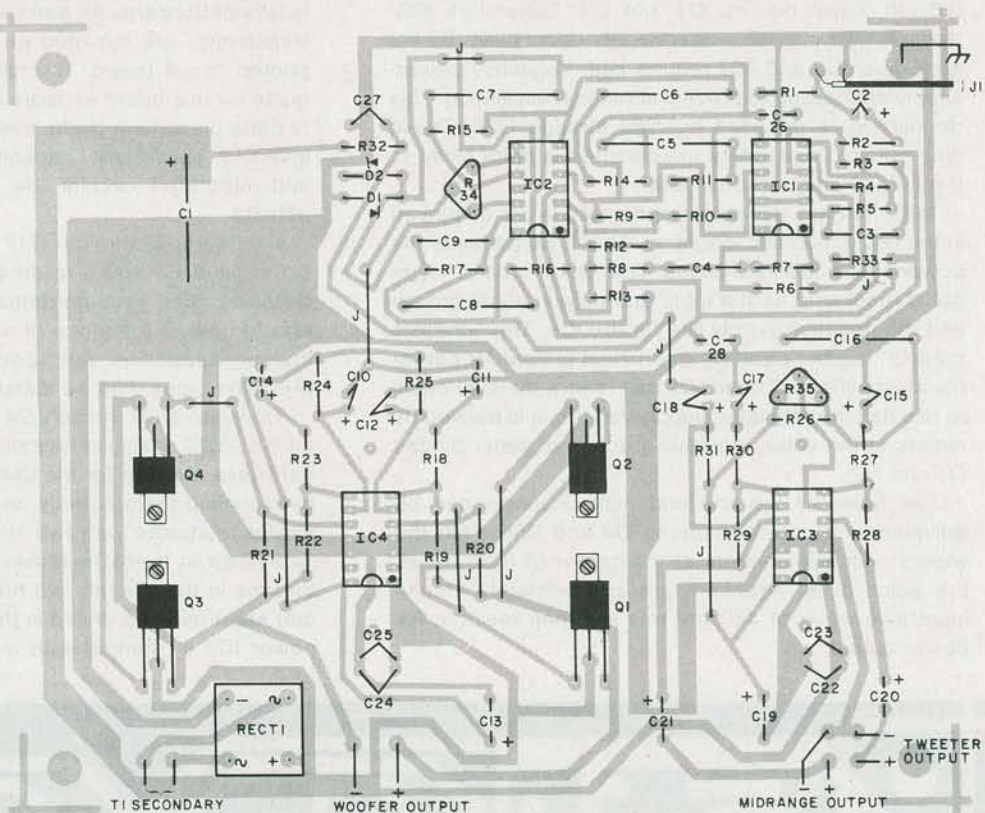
Component layout diagram for the printed circuit board. Transistors Q1 through Q4 are mounted on heat sinks.
